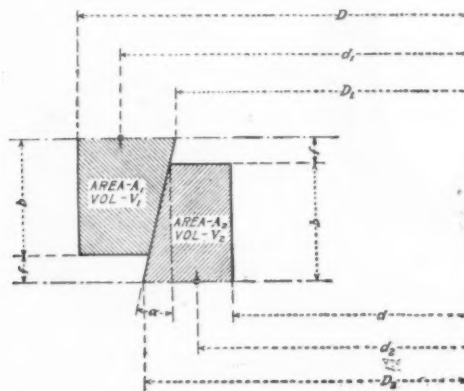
CROSS-SECTION OF A SINGLE RING ELEMENT
